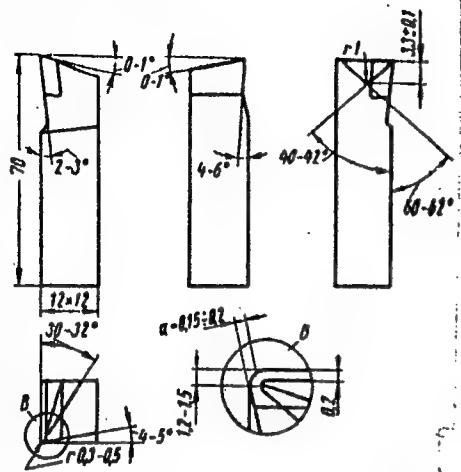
Geometrical parameters of tangential cutters for machining 1Kh18N9T steel
